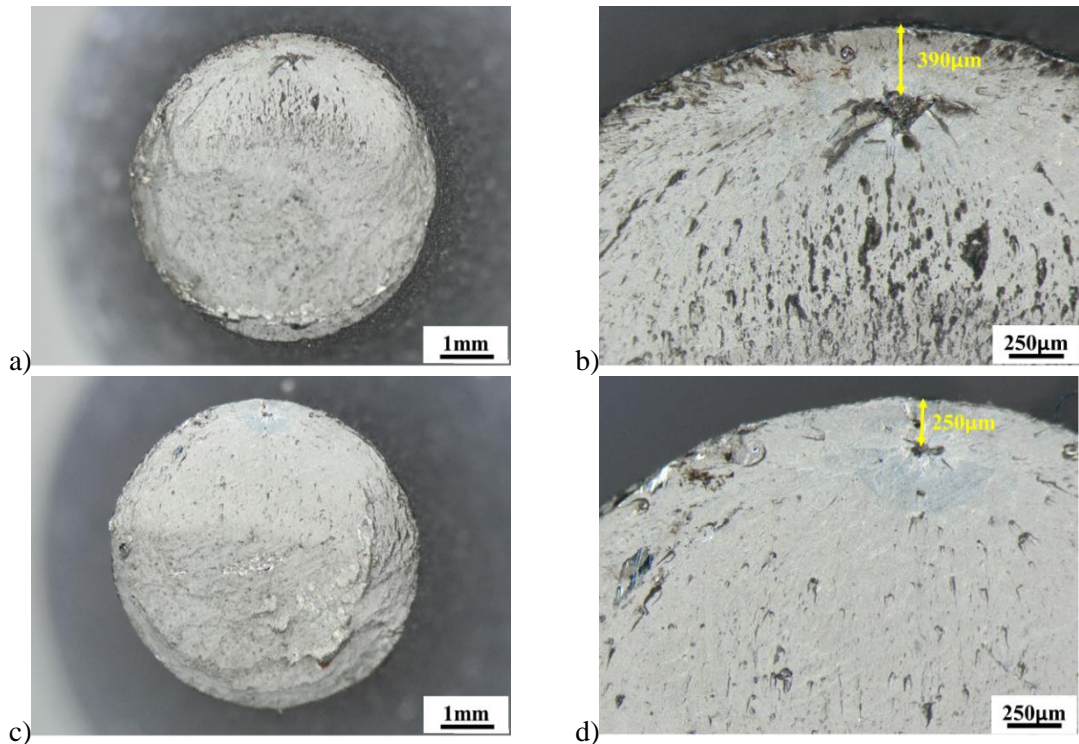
Fracture surfaces pictures of DryLyte® specimens. a,c) 12,5x; b,d)40x
